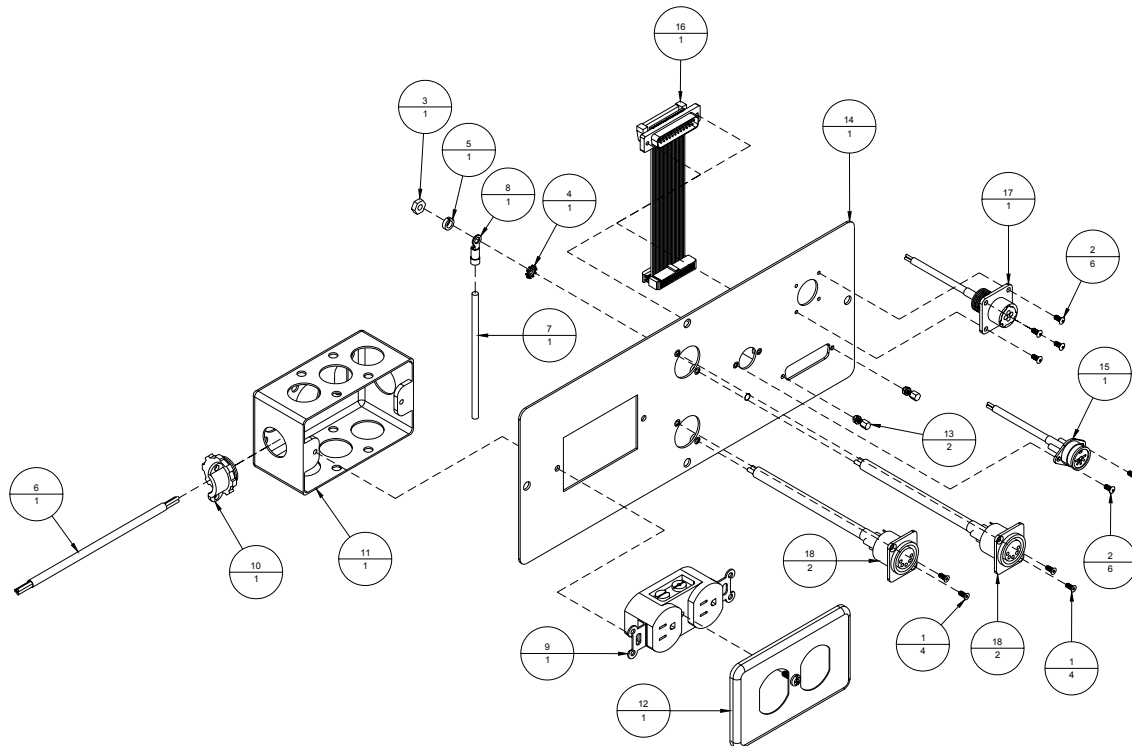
Plate, Rear Connector Assembly, BK60B (9102430A)
